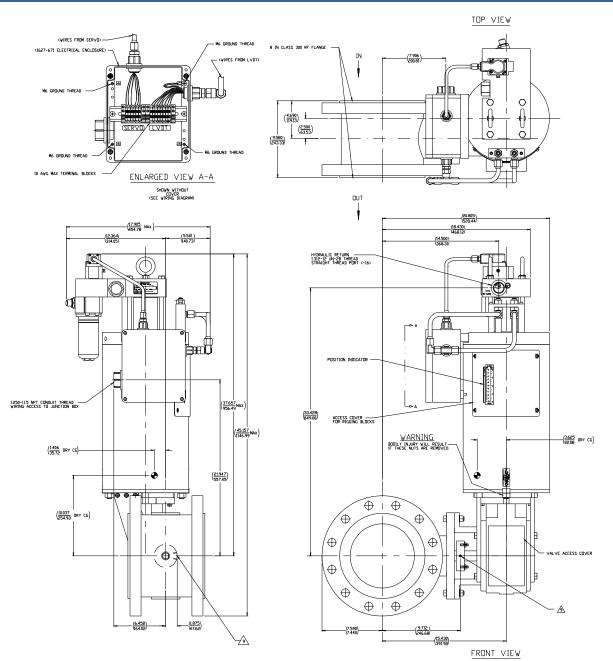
Gas Stop/Ratio Valve Outline Drawing (8-inch, with 2 LVDTs)
